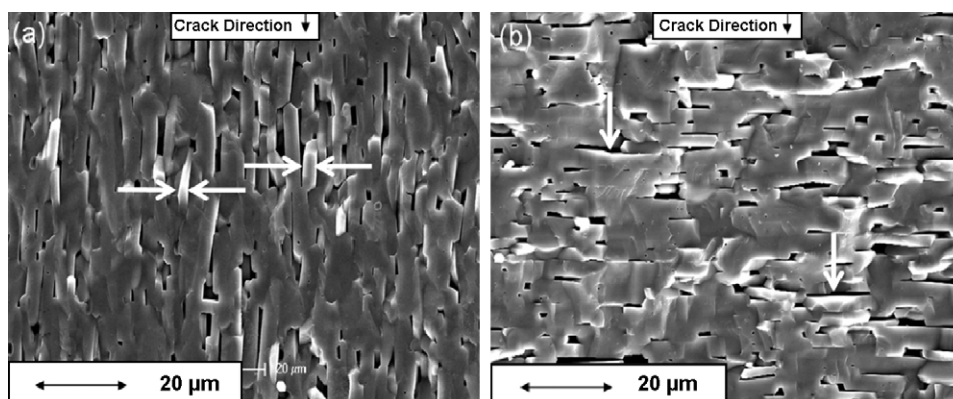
SEM micrographs showing the fracture surfaces of differently oriented samples following fracture toughness measurement ((a) perpendicular mode and (b) parallel mode).
